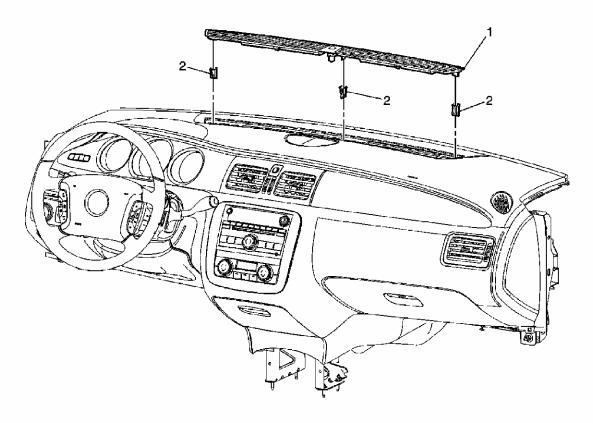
Identifying Defroster Grille Courtesy of GENERAL MOTORS CORP.
